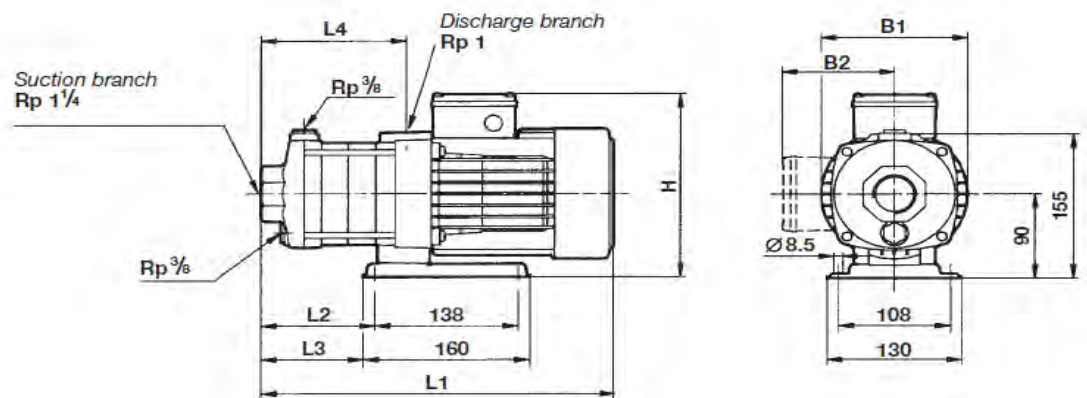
The pump dimensional drawing. All dimensions are in millimeter except for suction and discharge branch which are in inch.
